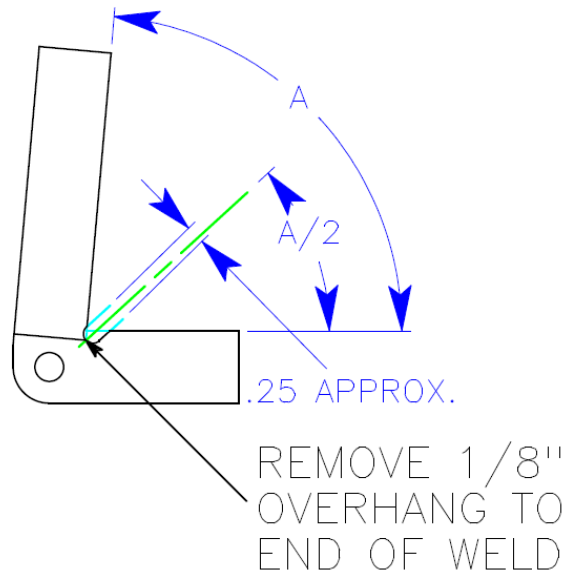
1 Weld Clean-Up for types "A" and "B", Ref [4]
